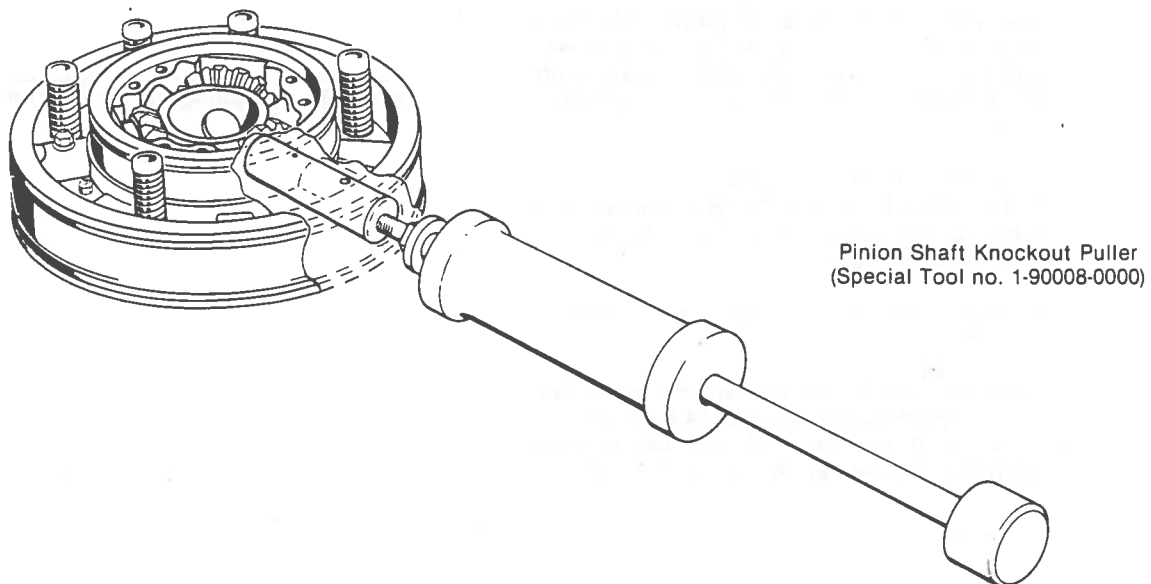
Removal of Pinion Shaft from Gear Carrier.
